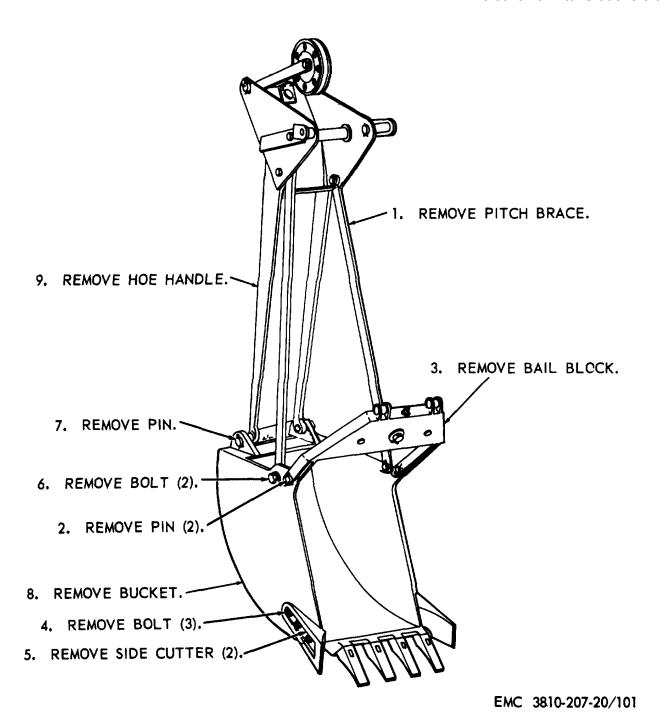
Back hoe bail block, bucket, and handle, removal and installation.
